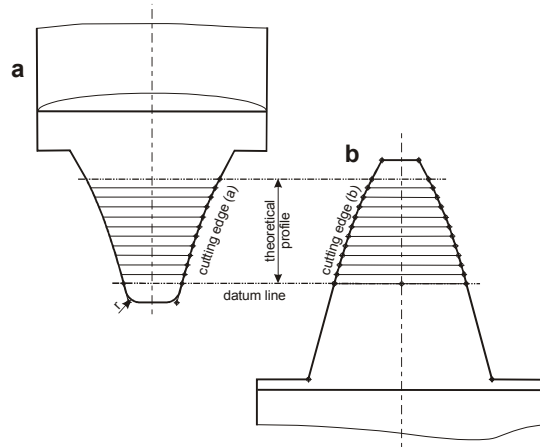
Cutting tool profiles in the normal section: a) gear cutting tool profile, b) worm cutting tool profile
